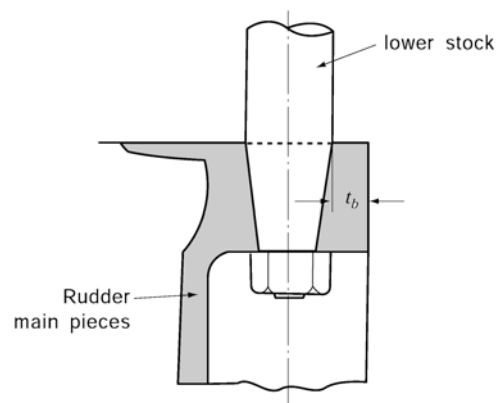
Coupling between rudder lower stock and rudder main pieces
